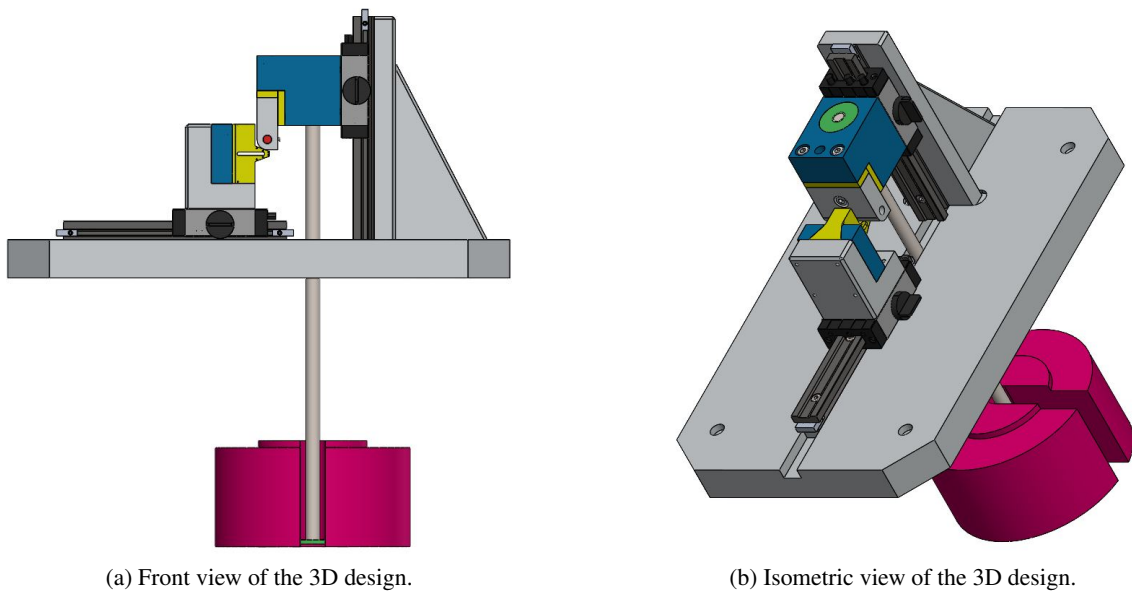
Final 3D design of the complete gear tooth heating and loading system.
